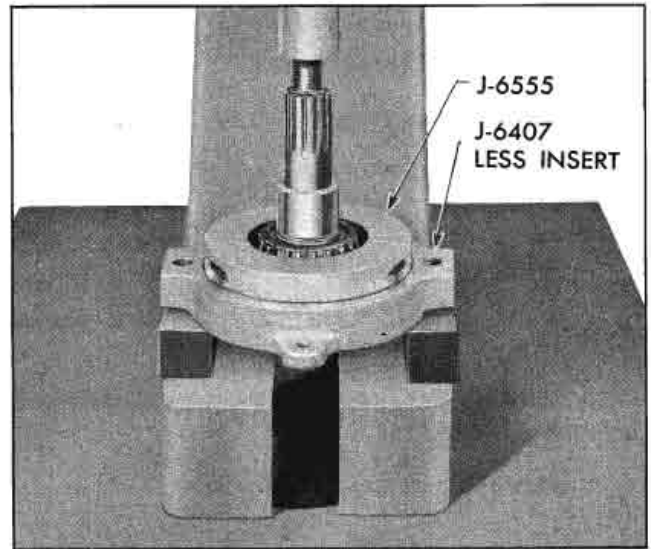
Removing Rear Bearing with J-6555 and Press Plate J-6407 Less Insert
